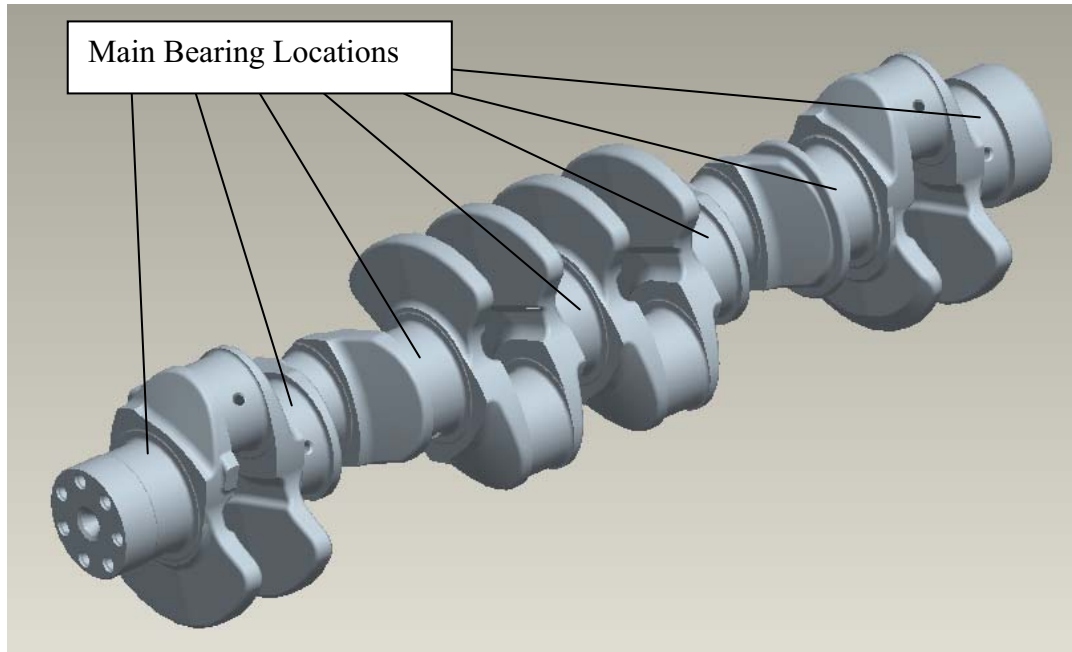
Crankshaft of the 7.3 L engine [51]
